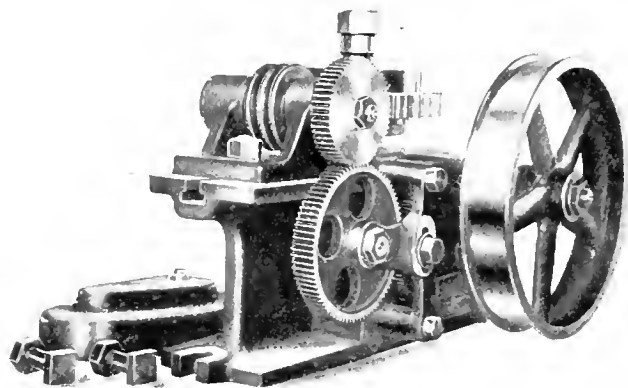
Front View of the Attachment with the Gear Guard Removed, showing Mechanism.
